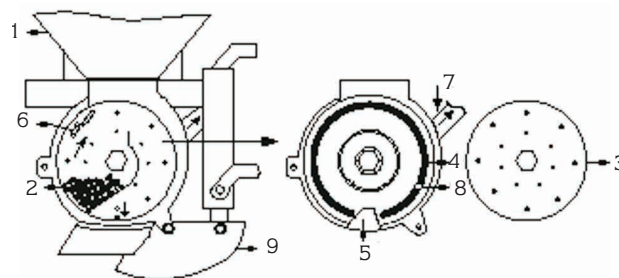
The single seed metering unit of the pneumatic planter: 1, seed hopper; 2, seed; 3, seed plate; 4, air suction canal; 5, air cut; 6, separator; 7, vacuum tube to fan; 8, infrared receiver of electronic counter; 9, furrow opener.
